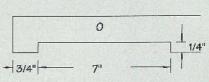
Notch the top rear trim piece to receive the cord storage door.
